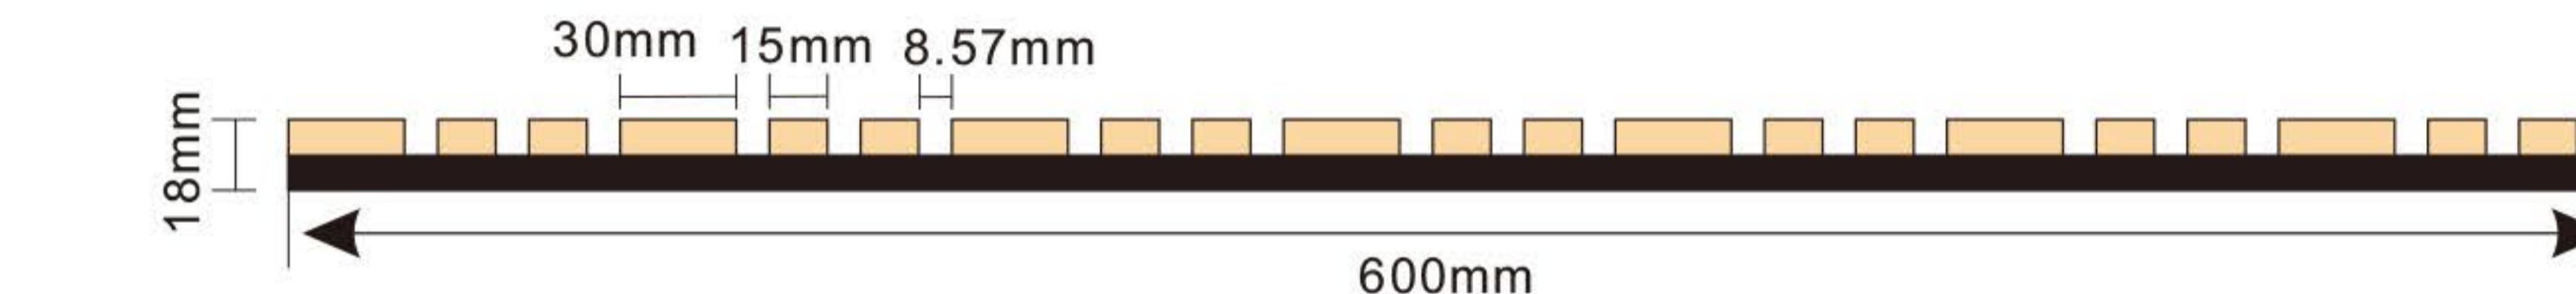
DETAILED DRAWINGS OF PRODUCT DIMENSIONS
